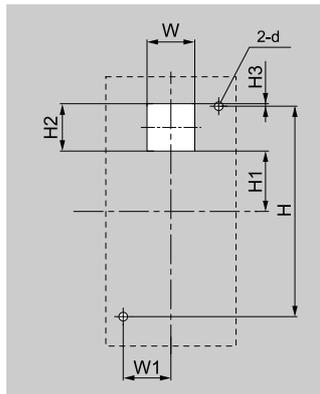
Panel Cut-Out Dimensions for Mounting to Exterior of Control Panel
